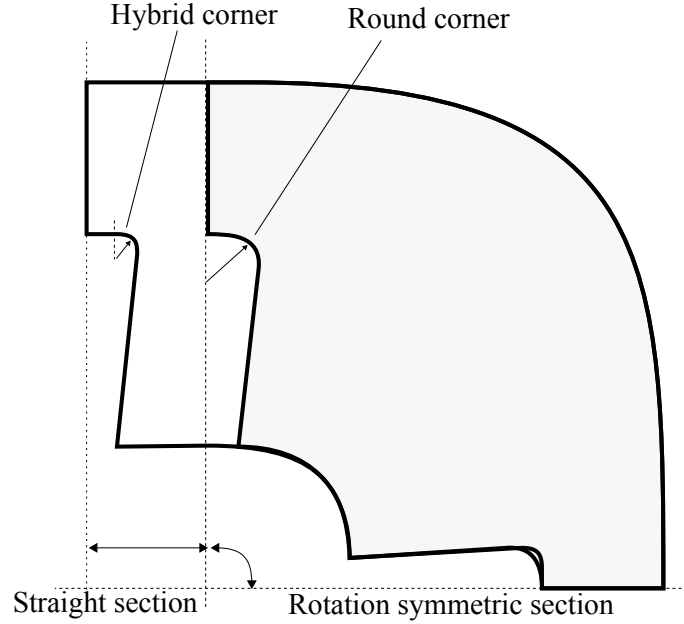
A rough illustration of the Airbus blank design and the simplified blank design in gray.
